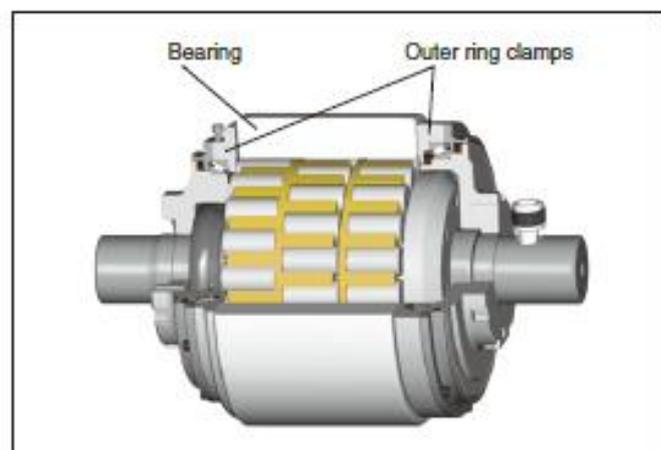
Typical Installation of Suitable Bearing on Jig Type 2
